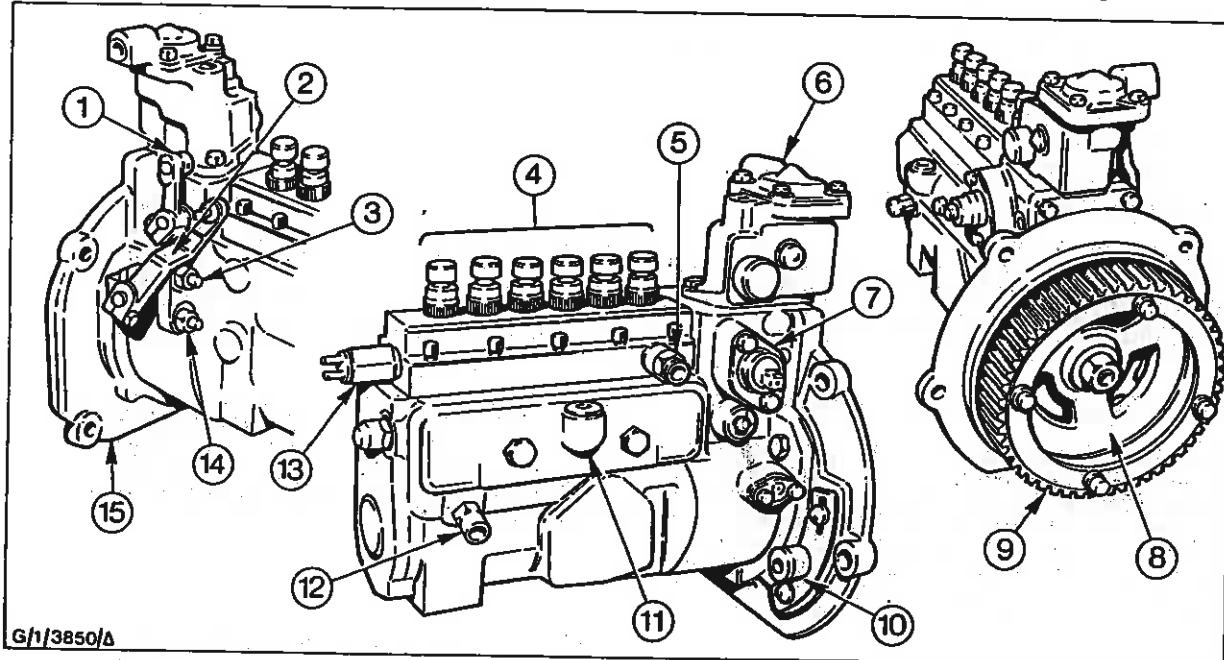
CAV Fuel Injection Pump (Automotive and G.P. Governed Type Shown)
